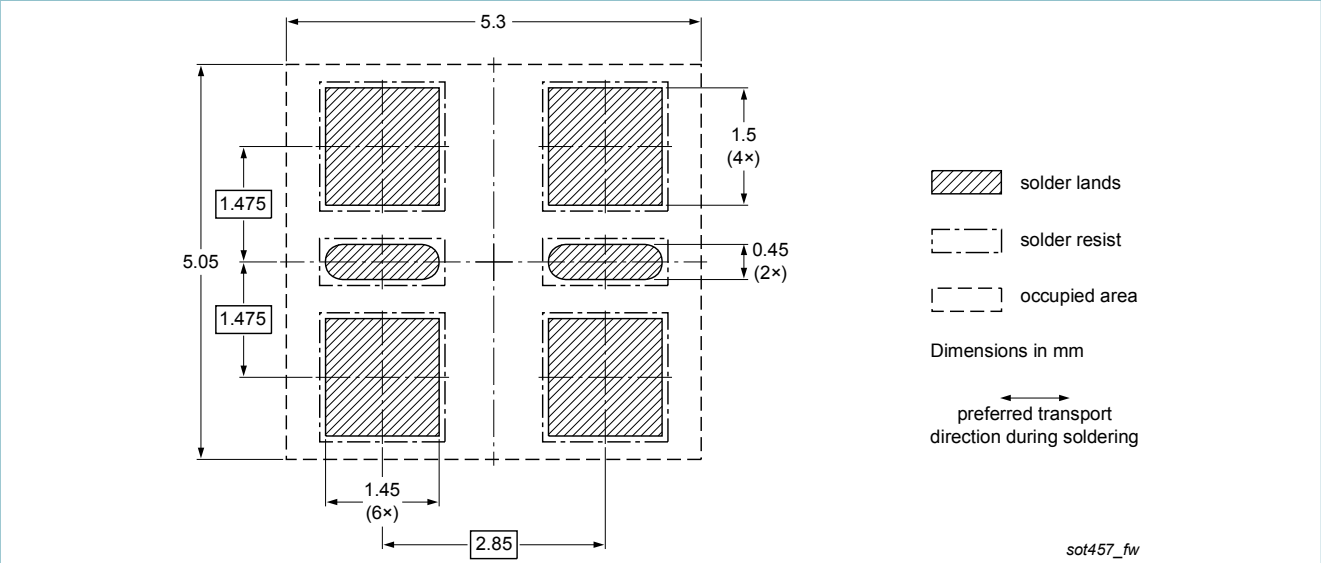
Wave soldering footprint for SOT457 (TSOP6)
